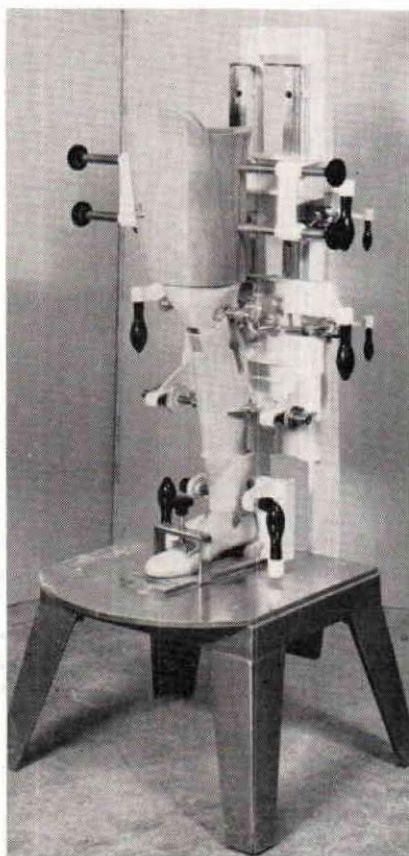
Three Components in Transfer Jig, Ready for Cutting Down.
